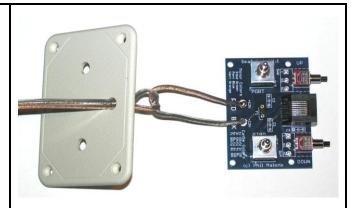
Power Cord Passed Through the Box Lid and Connected to the PCB
